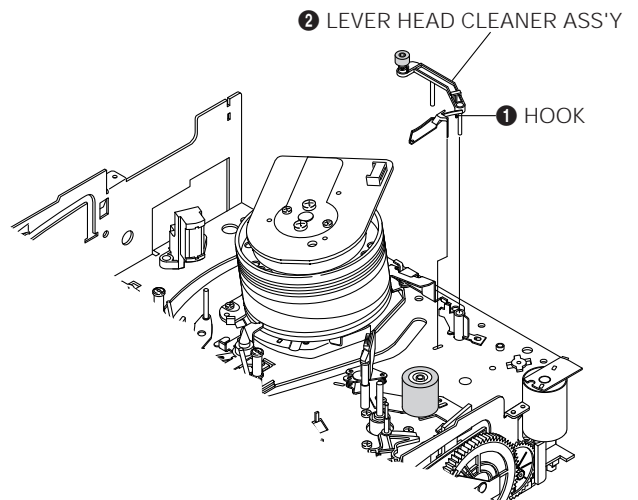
Lever Head Cleaner Ass'y Removal
